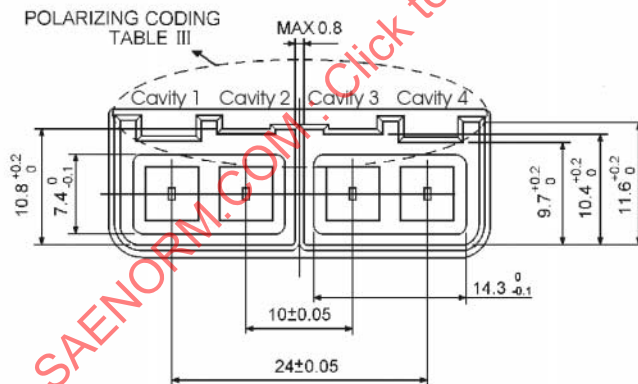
4 Contact – Receptacle Basic Dimensions
